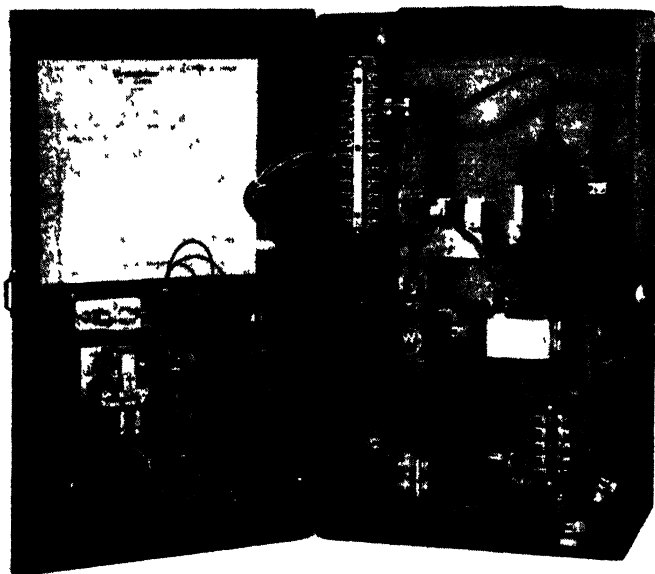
The Weld-O-Trol—an electronic switch using ignitron and copper oxide rectifiers for welding. (Courtesy Westinghouse Electric Corporation.)
